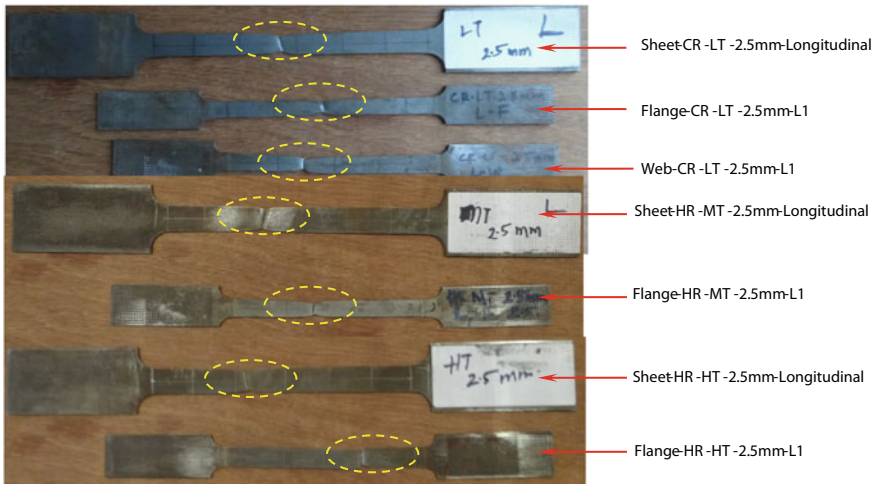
Experimental fracture of 2.5 mm thick longitudinal direction cut coupons—L1 (before and after forming)
